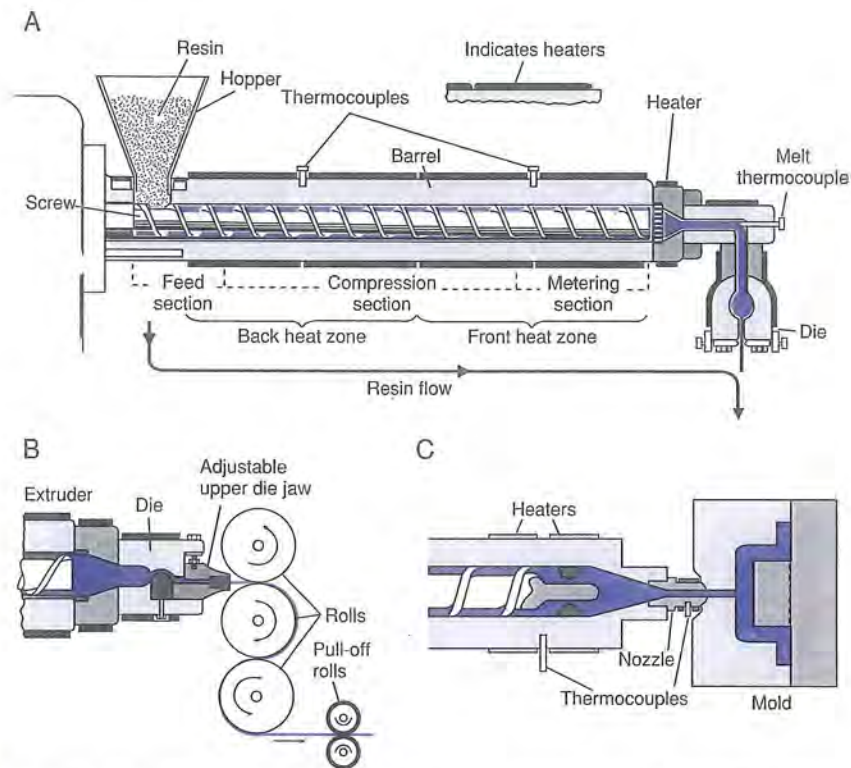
Polymer forming processes based on the use of a screw-type extruder: (A) Extrusion. (B) Extrusion of sheet. (C) Injection molding. Modified from R. J. Baird, *Industrial Plastics*, Goodheart-Willcox Co., South Holland, IL (1976).
